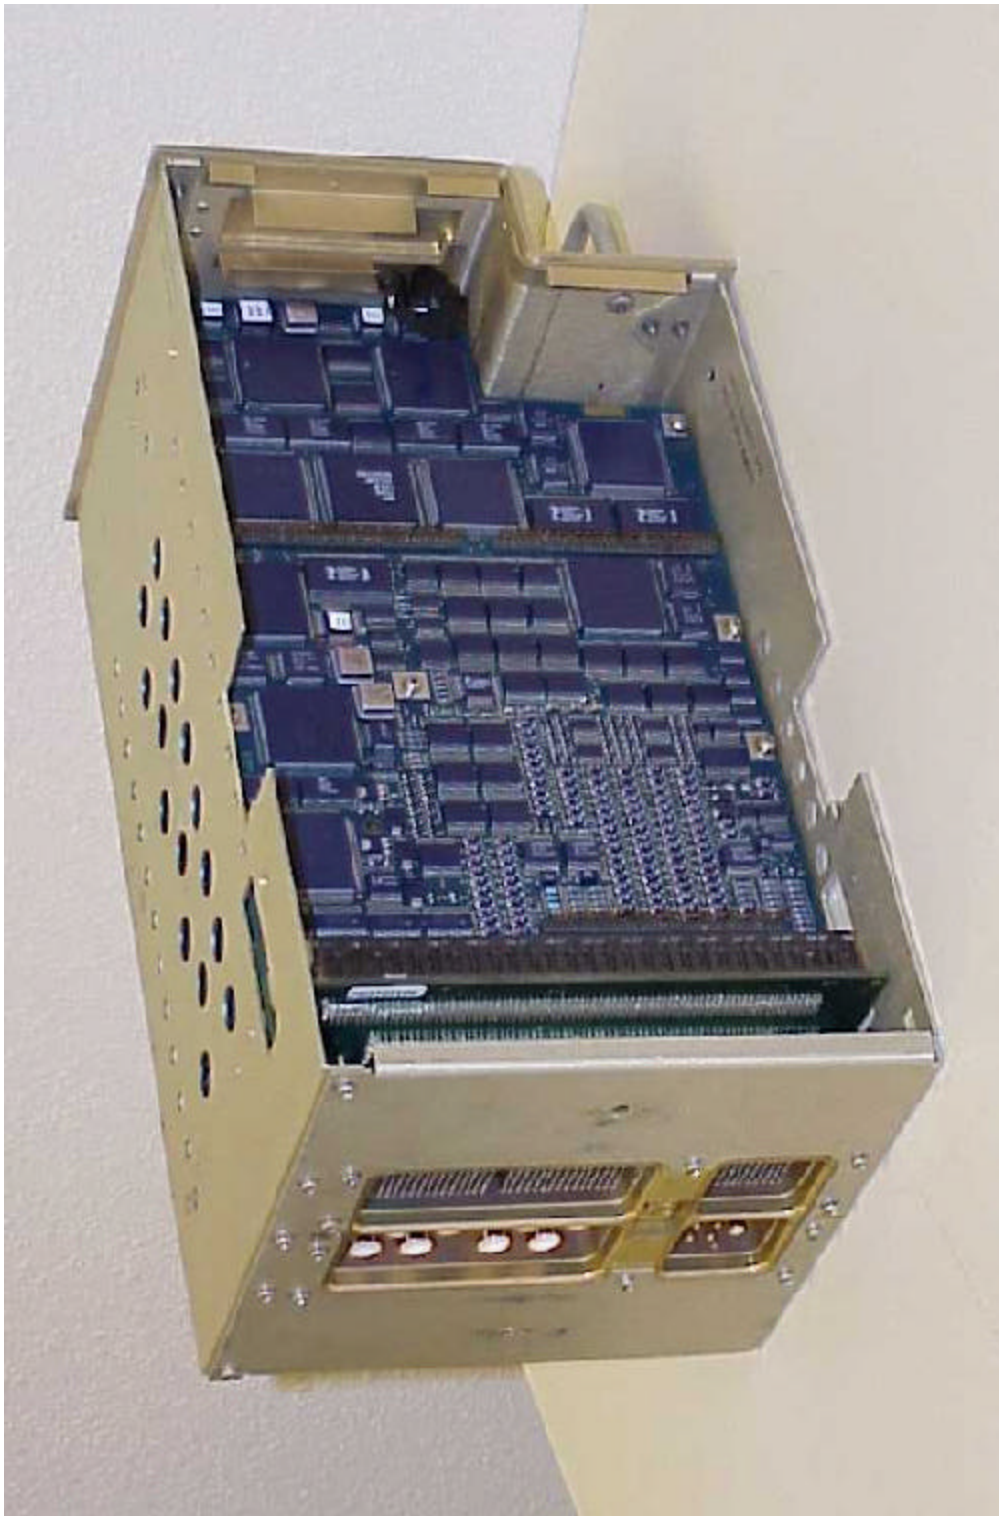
View of Unit Side, Cover Removed, Showing A8 GPS and A5 Receiver – I/O Assembly
